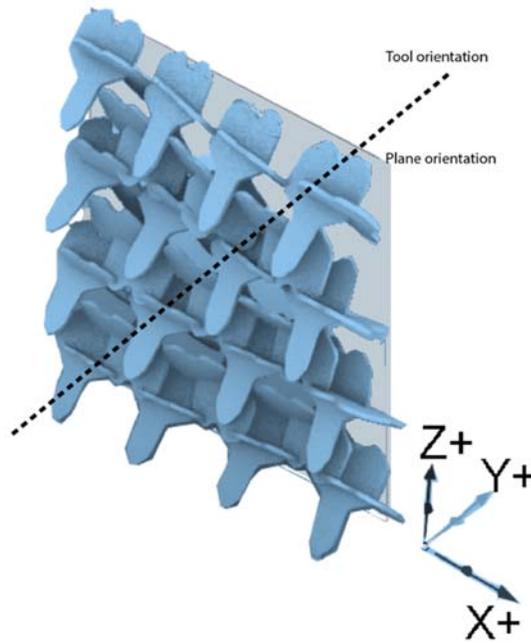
Tool orientation for CNC milling and 2 axis cutting (produced by author)
